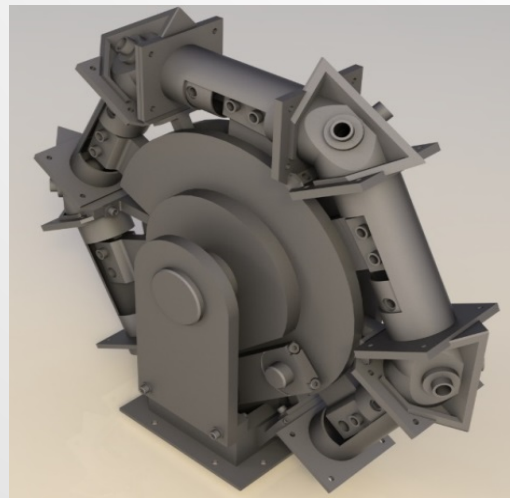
Assembly Rendering of SCO2 Expansion Engine
